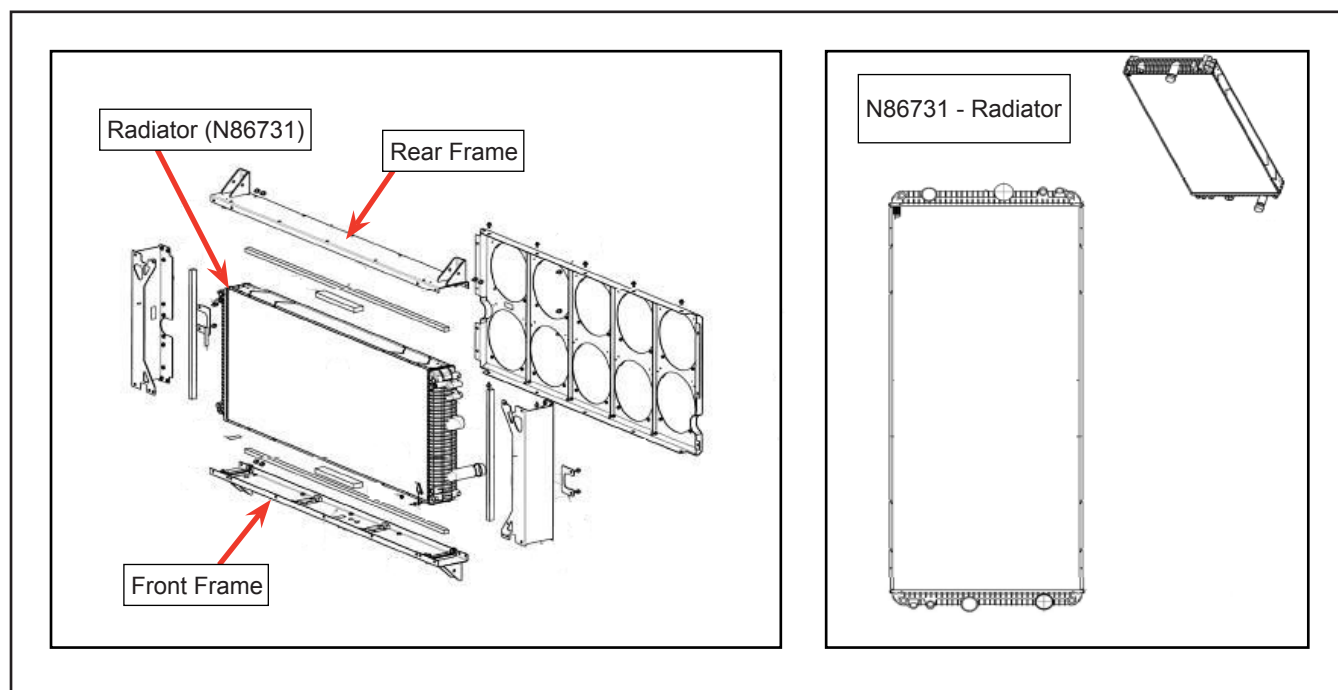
Typical View of Installation of Radiator into Radiator Assembly Frame
